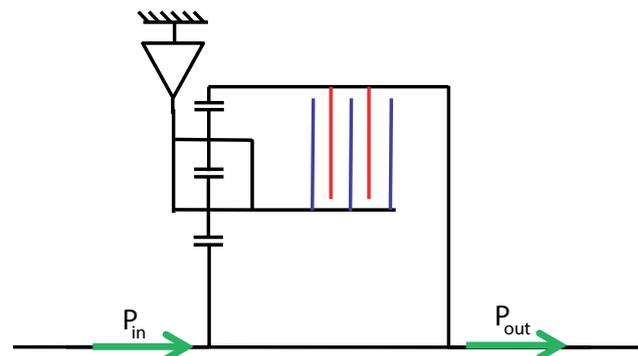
Schematic cross-section of double pinion epicyclic gearbox with clutch.
